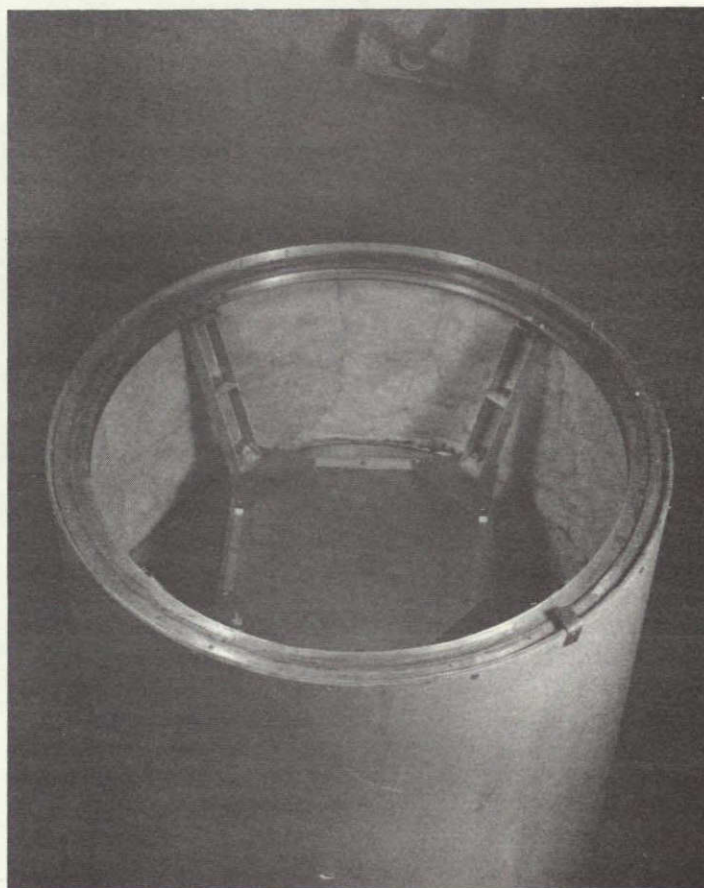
PHOTO OF MODEL MOUNTING TRUSSES
